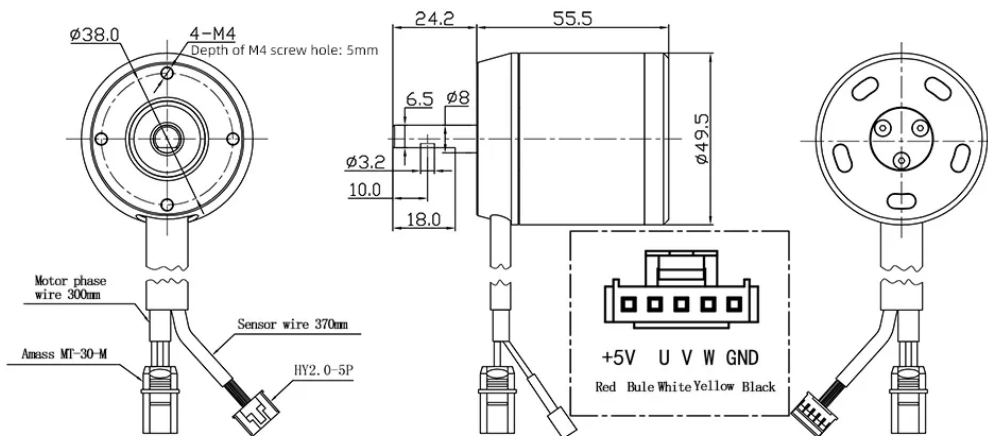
Outline drawing of the Flipsky H5055 200KV motor [2]
